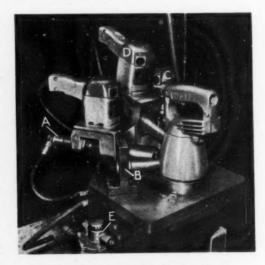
This Special-purpose Machine, Designed by the Company, Incorporates Three Wolf Electric Drills. The Spindles are Hydraulically Operated
